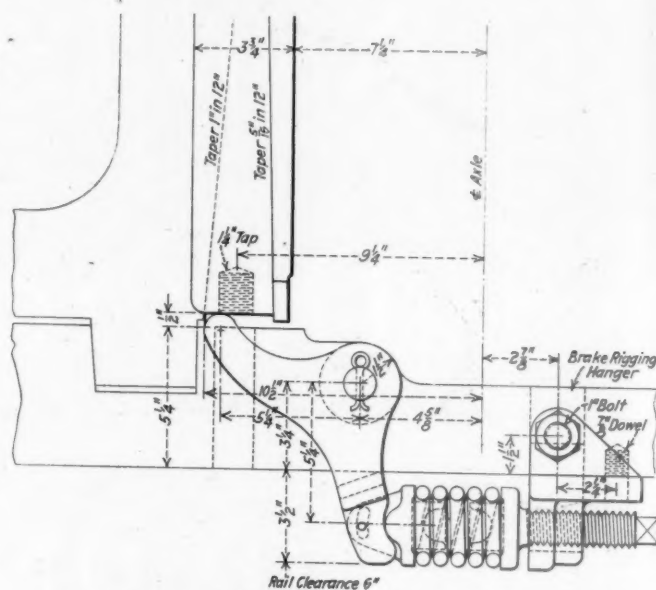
Bellcrank Lever and Horizontal Adjusting Spring Give Ample Rail Clearance
